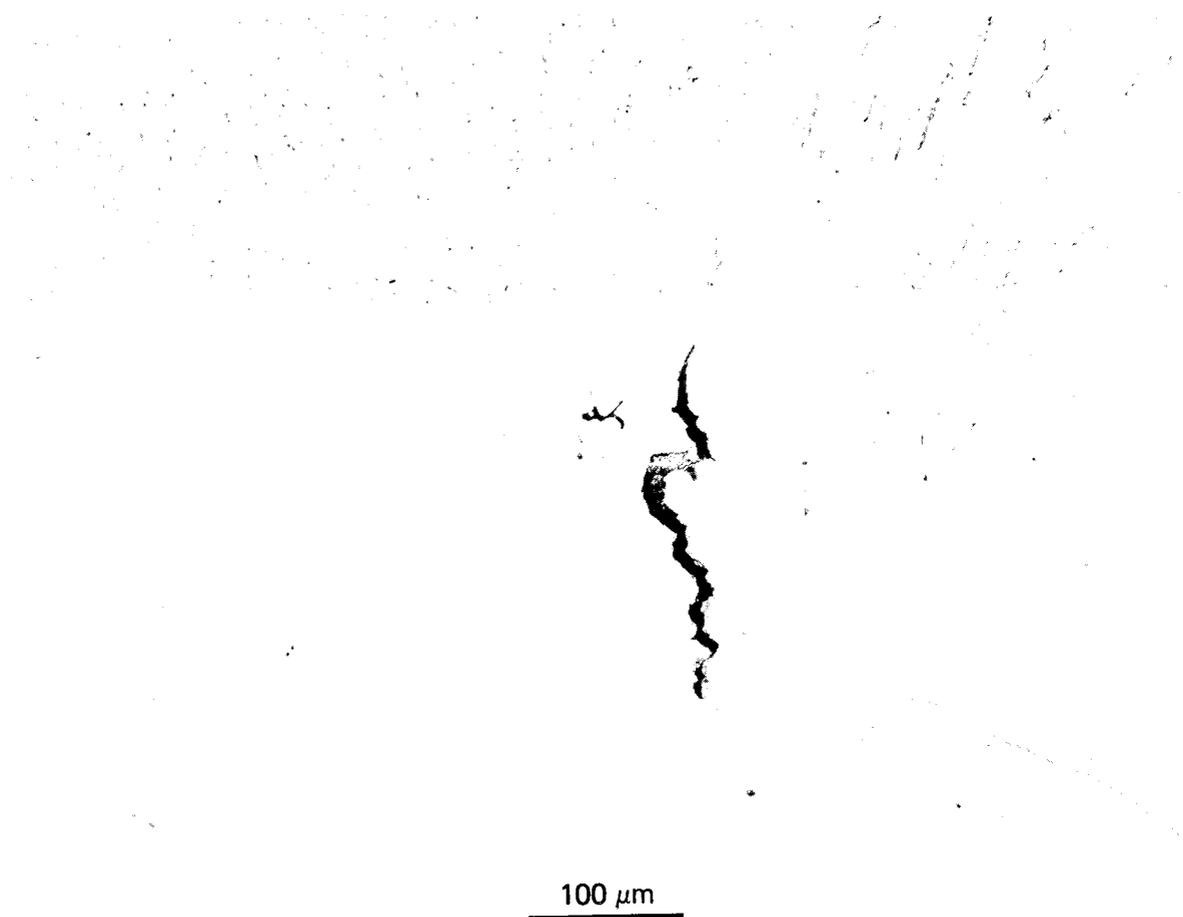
Heat-affected zone hot crack from weld-clad forging bottom.
